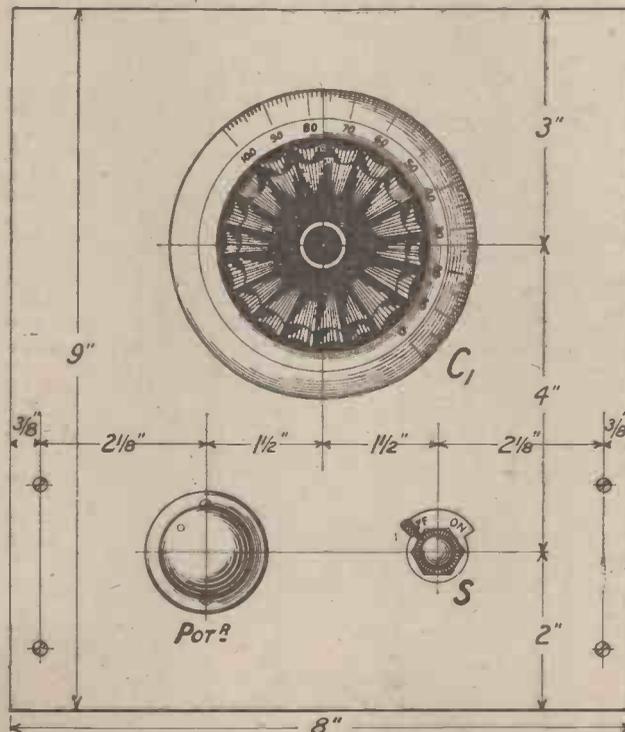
The drilling dimensions, few as they are, can be obtained from this figure.
